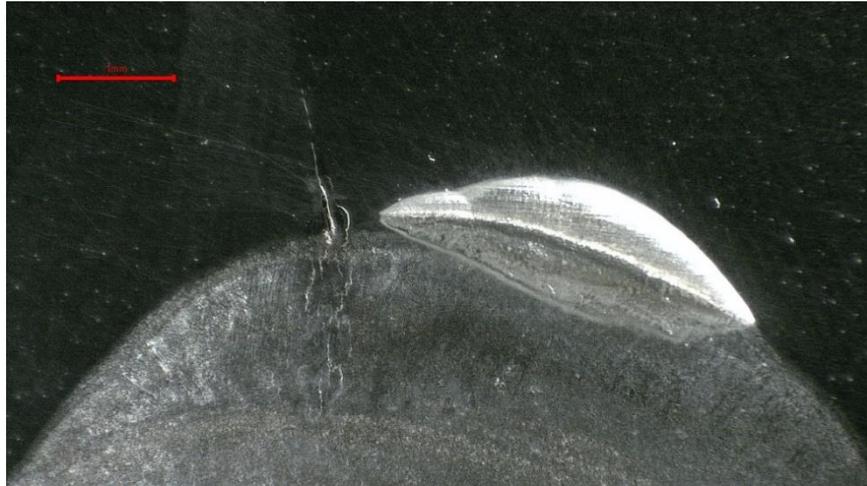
Appearance of crack in first test specimen after machining.
